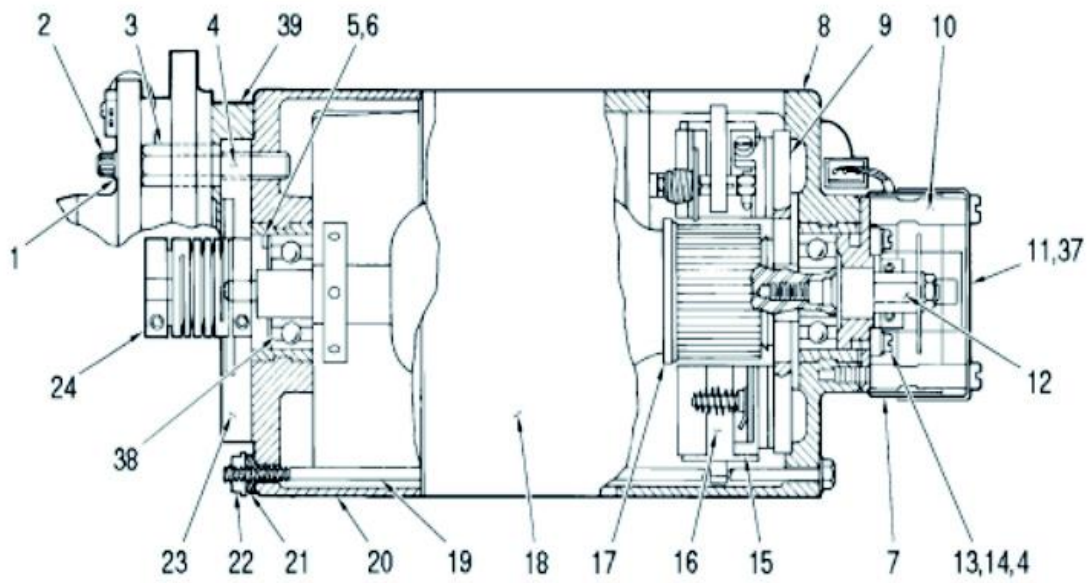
RC5C PLUS Motor Assembly (Brush Motor)
